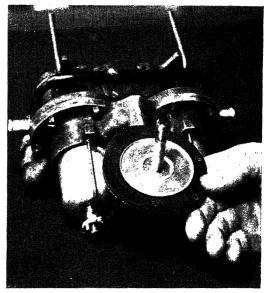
Amal fuel fump diaphragm and spindle assembly.
